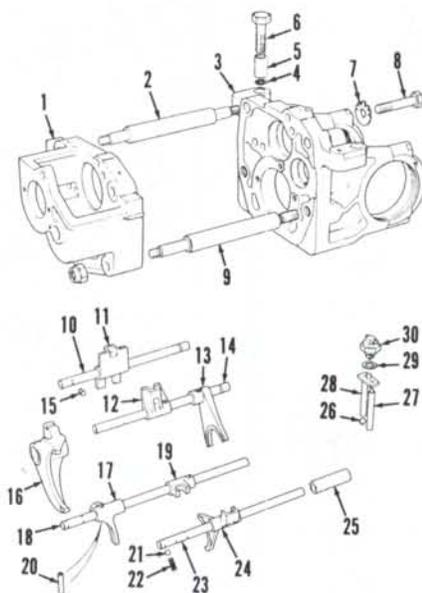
Exploded view showing end plates, shift rods and shift forks used on 1190, 1194, 1290, 1294 and 1390 models.
